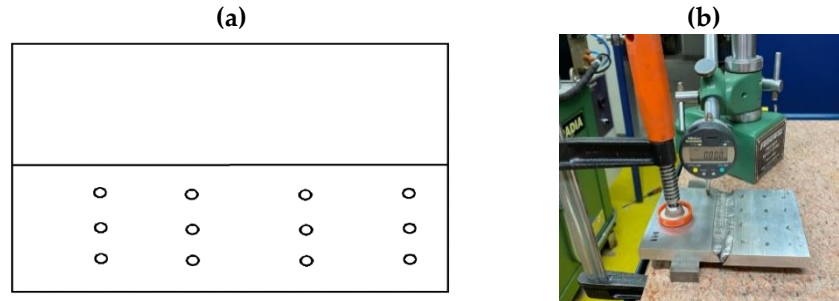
Distortion measurement (a) Position of 16 points on welded samples, (b) Current digital caliber equipment
